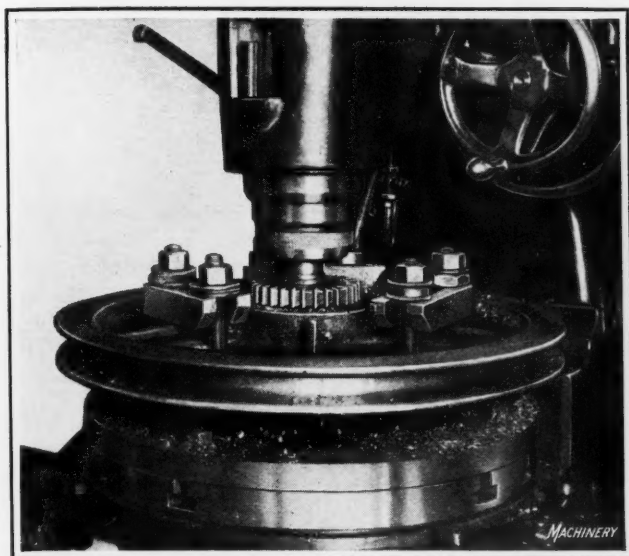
Straddle-milling the Face of the Hub of a Crane Sheave
